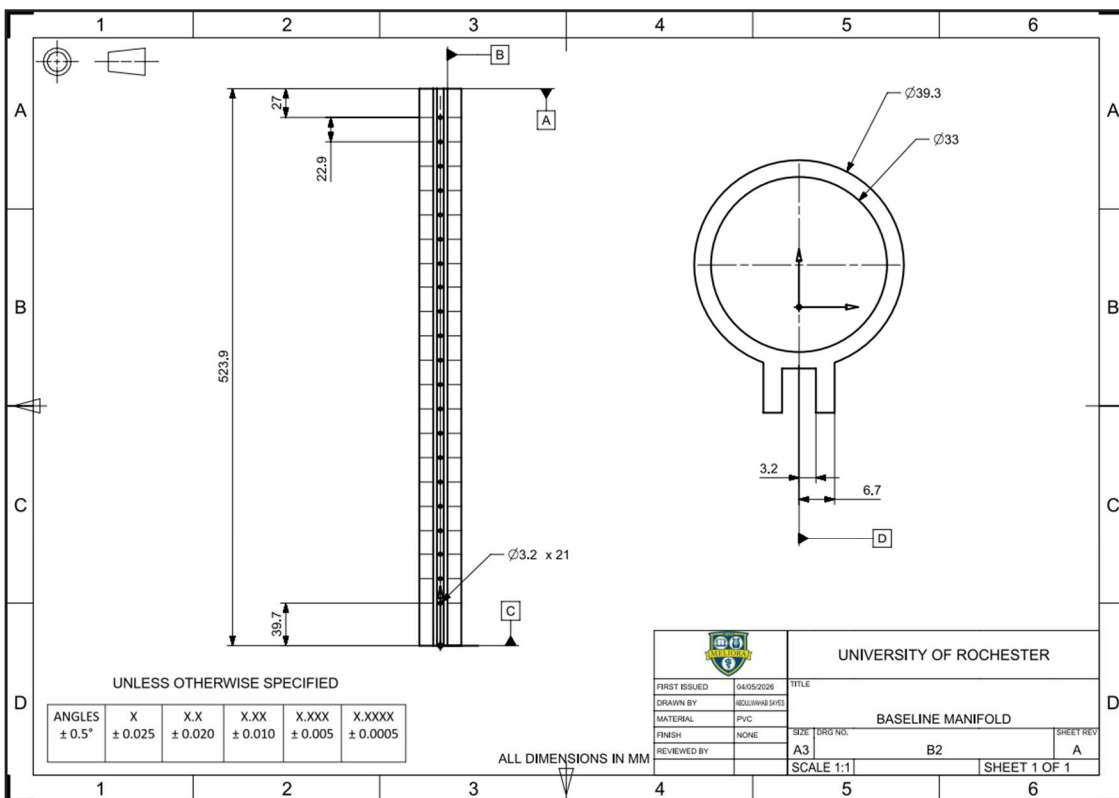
shows the baseline manifold design used in CFD and for manufacturing the testing part.
